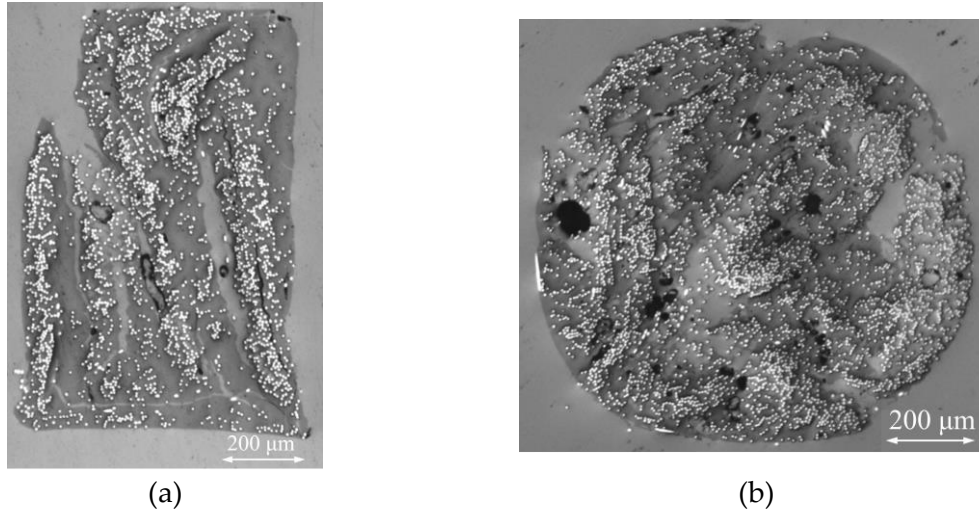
Cross-section microscopy of (a) square-like filament after the compression process in the DcAFF machine; (b) final circular filament ready to use in a 3D printer.
